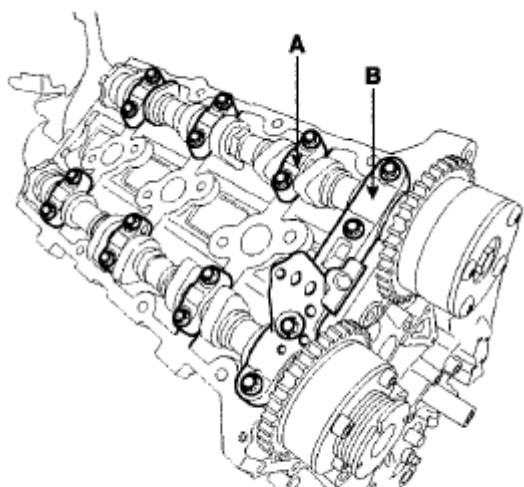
Identifying RH Exhaust Camshaft OCV (A)
